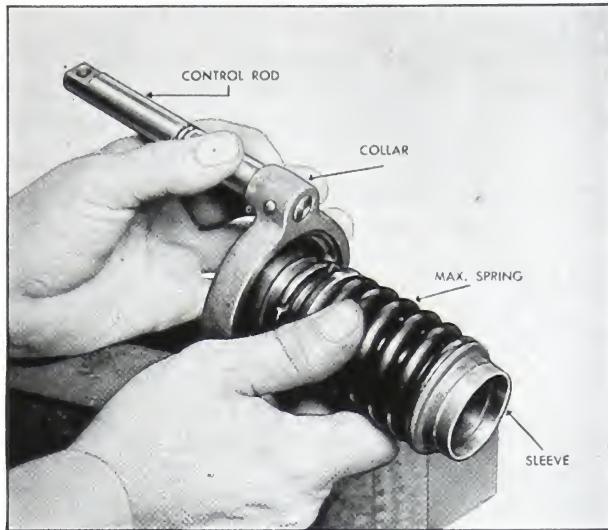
Control rod and collar assembled to yoke sleeve
